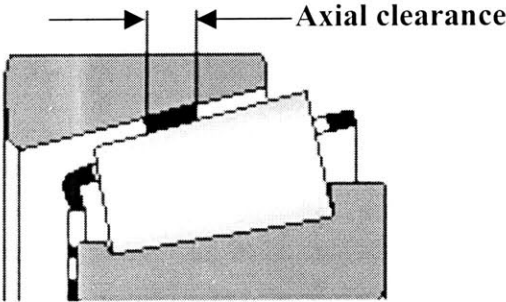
Axial clearance that determines bearing preload (Courtesy of The Timken Company)
